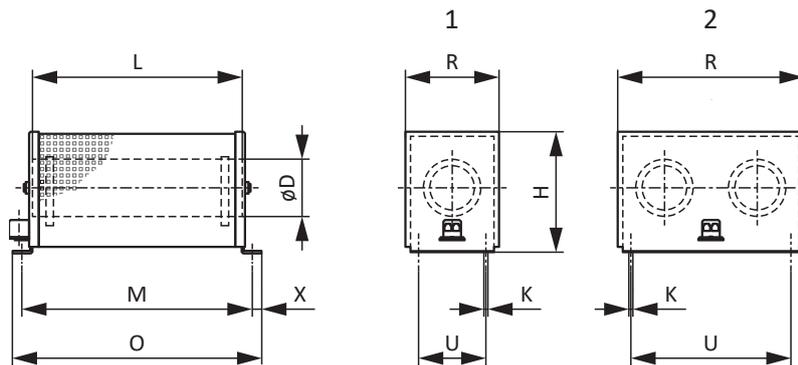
FZMU (1), FZZMU (2) dimensional drawing
